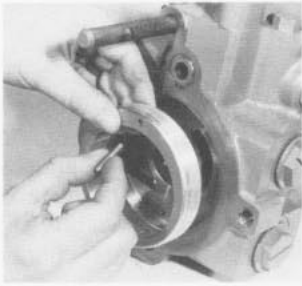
Orienting Gerotor Ring and Pin (CW) (Earlier Units)
